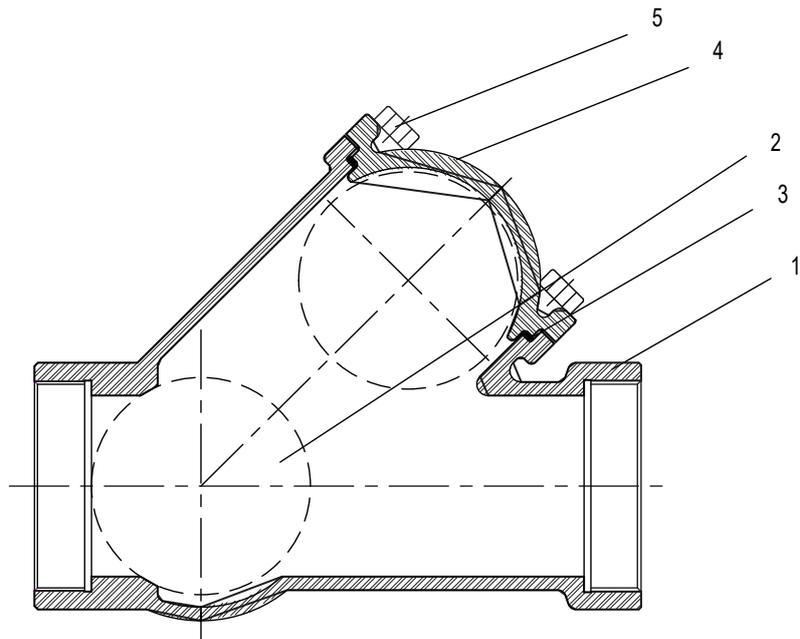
Sectional drawing of BOA-RPL F-F with part numbers
